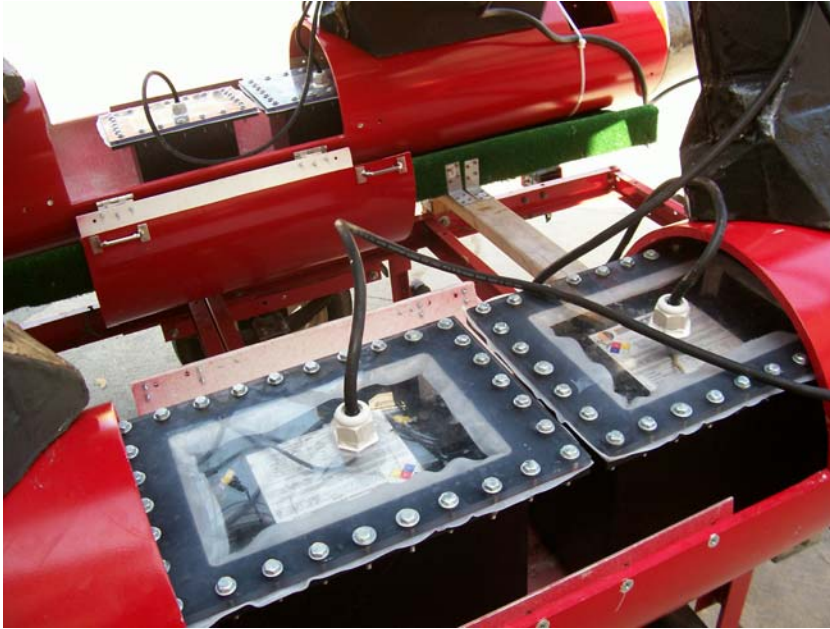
ABS battery boxes assembled and in hulls. The boxes are shown here completely assembled, sealed, and electrical whips in place while sitting in the hulls of the boat. The loading configuration of inserting batteries is similar to loading shells into a shotgun. It is easy to see inside the boxes due to the clear lids, which were sealed using lubricated latex.
